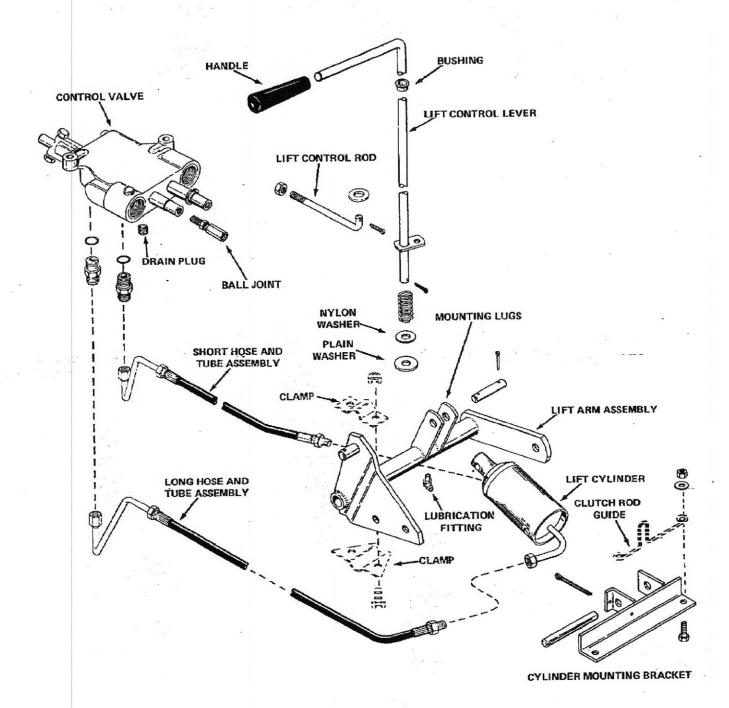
HYDRAULIC LIFT KIT ASSEMBLY
